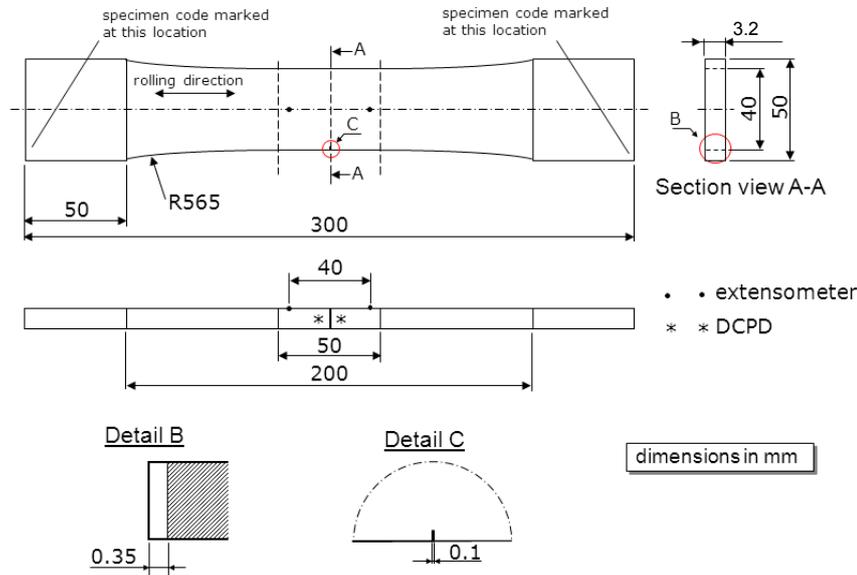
Single edge crack tension (SET) fatigue crack growth specimen
